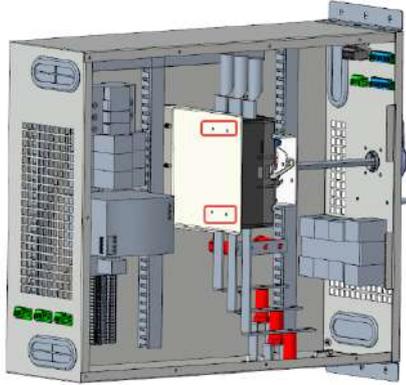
45 Remove the fixing bolts of the circuit breaker and remove the circuit breaker
